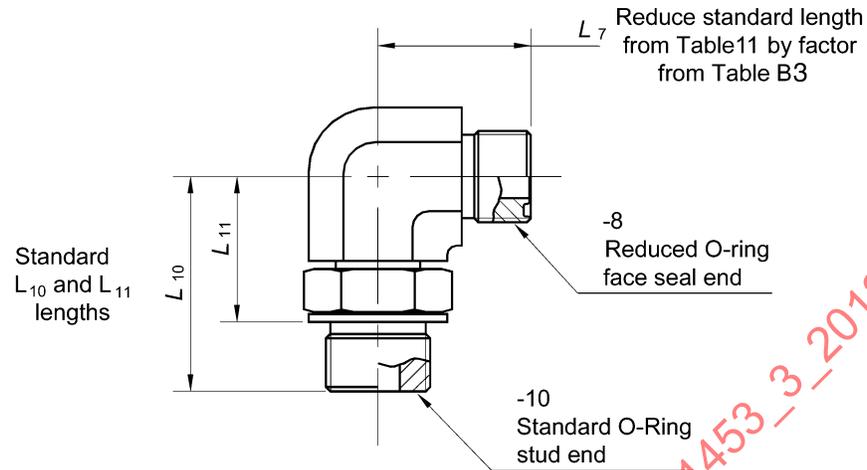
SHAPED FACE SEAL CONNECTOR WITH REDUCED FACE SEAL END (520220)
